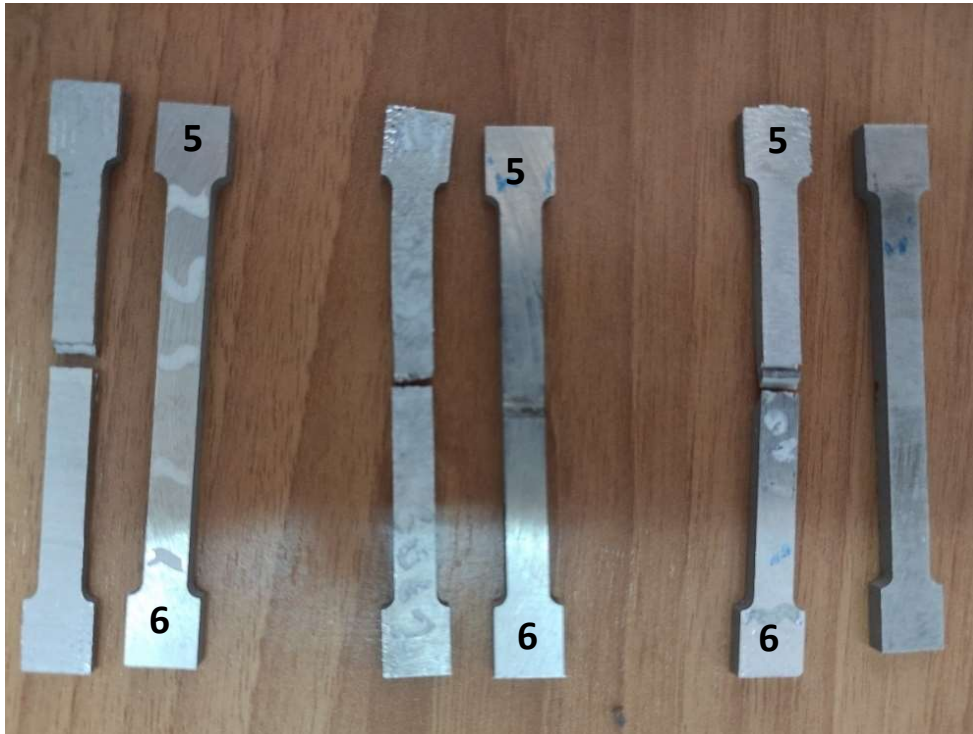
Tensile tested AA6061 and AA5083 samples welded with cylindrical pin.
